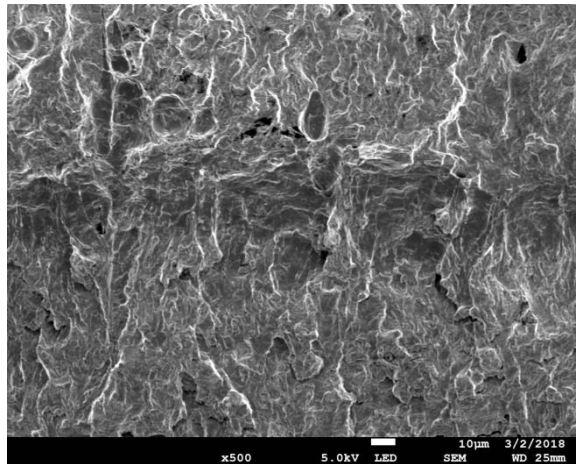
The image of the fracture surface obtained using the scanning microscope
